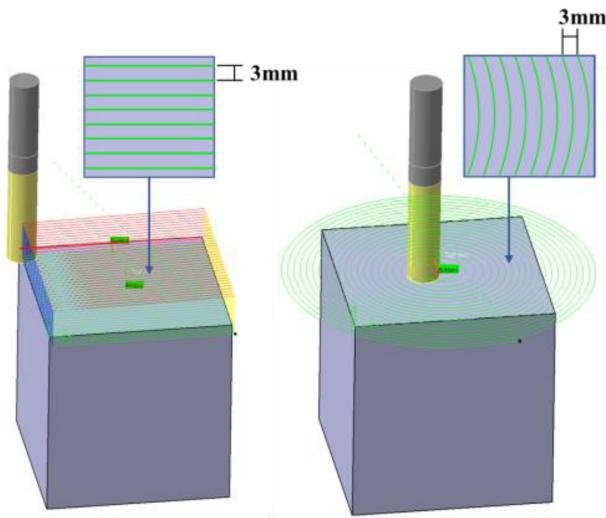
Cutting path for (left) linear machining test and (right) circular machining test
